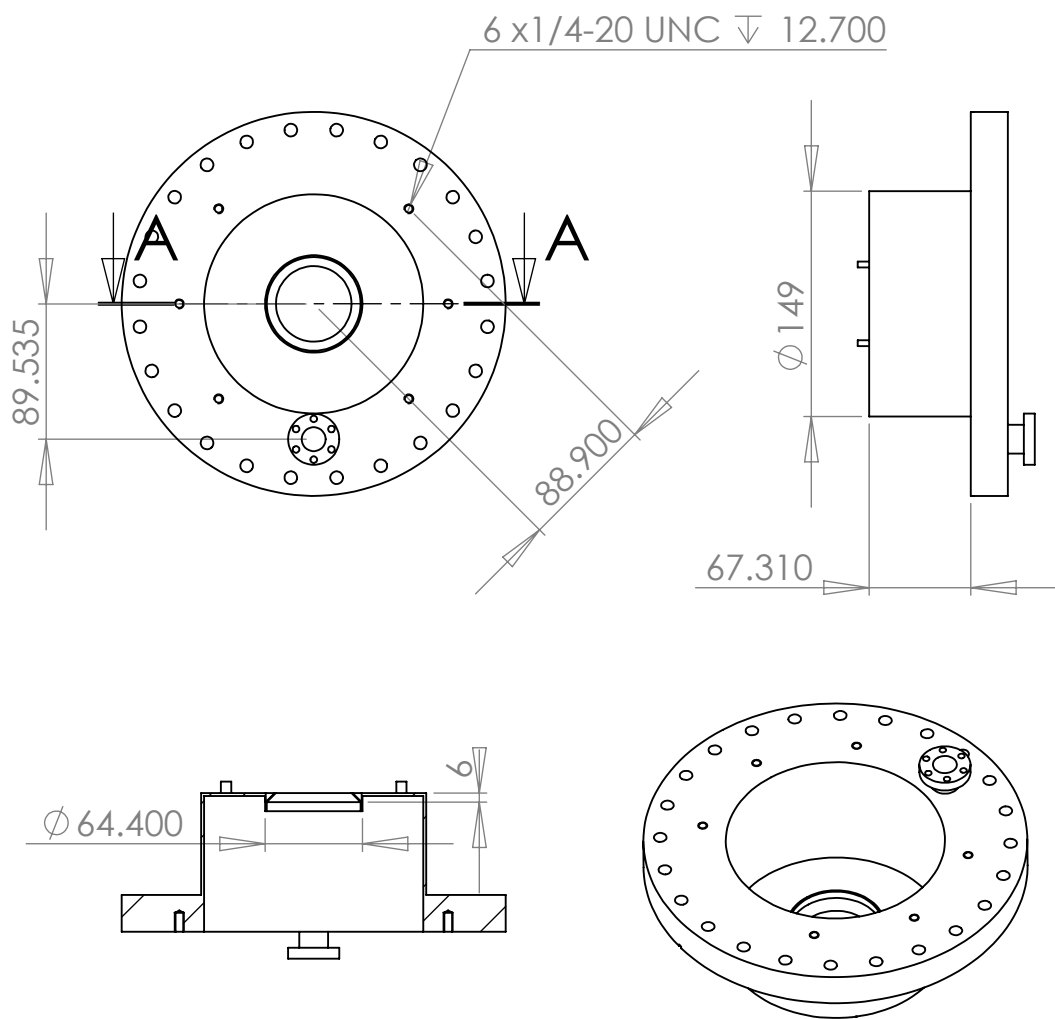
Mechanical drawing of top and bottom reentrant bucket window (the depicted miniflange UHV port, used for in-vacuum antenna RF feedthrough, is excluded on one of the two buckets). Built by UKAEA (contact [Simon.Hanks@ccfe.ac.uk](mailto:Simon.Hanks@ccfe.ac.uk)). Dimensions are mm.
